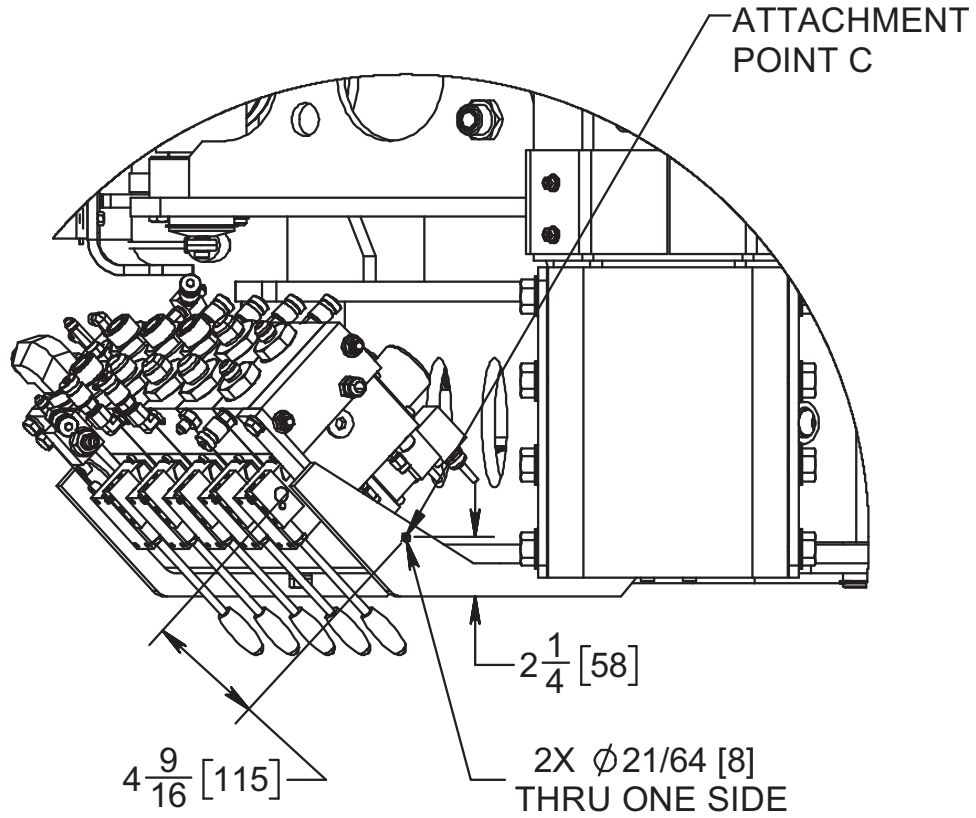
Detail B: TM120-125 Tong Valve Bracket Drill Hole Location
